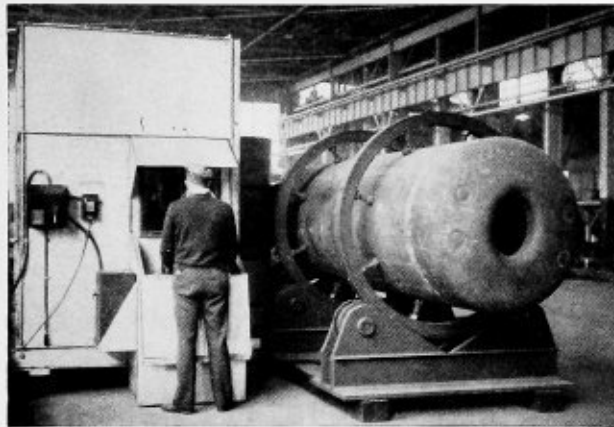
X-ray installation for the inspection of welded pressure vessels in a boiler shop
